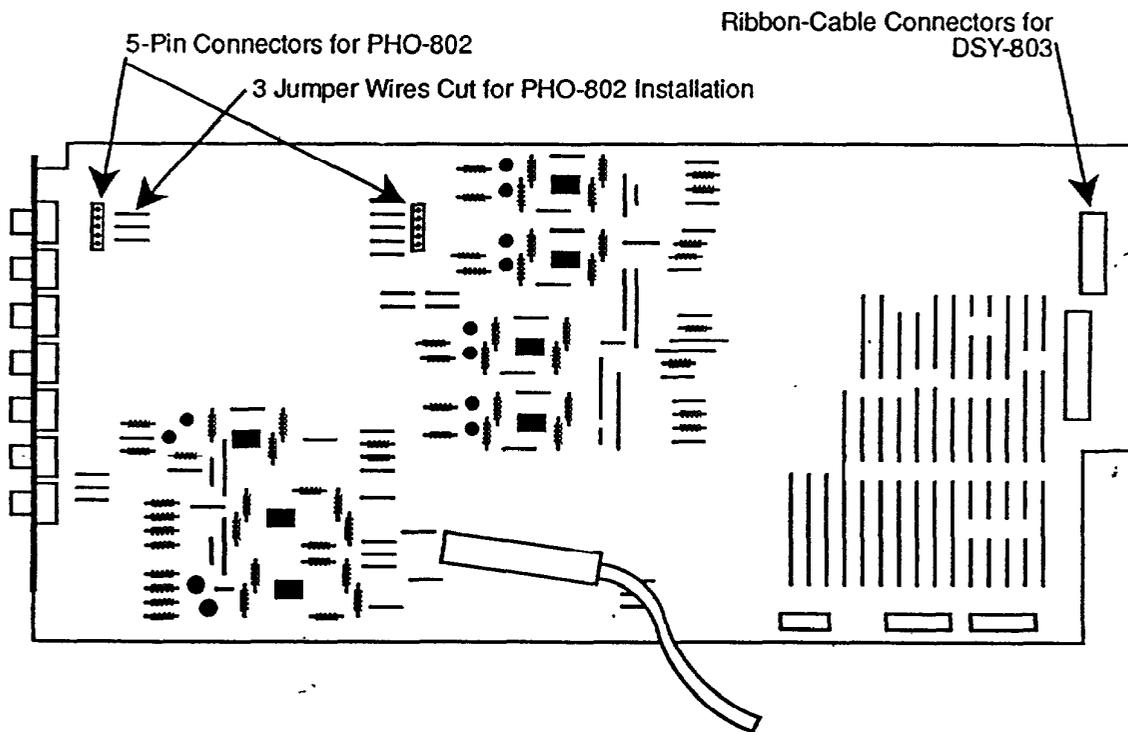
View of INPUT SIGNALS/REMOTE CONNECTORS Assembly Showing INPUT SIGNALS Board
